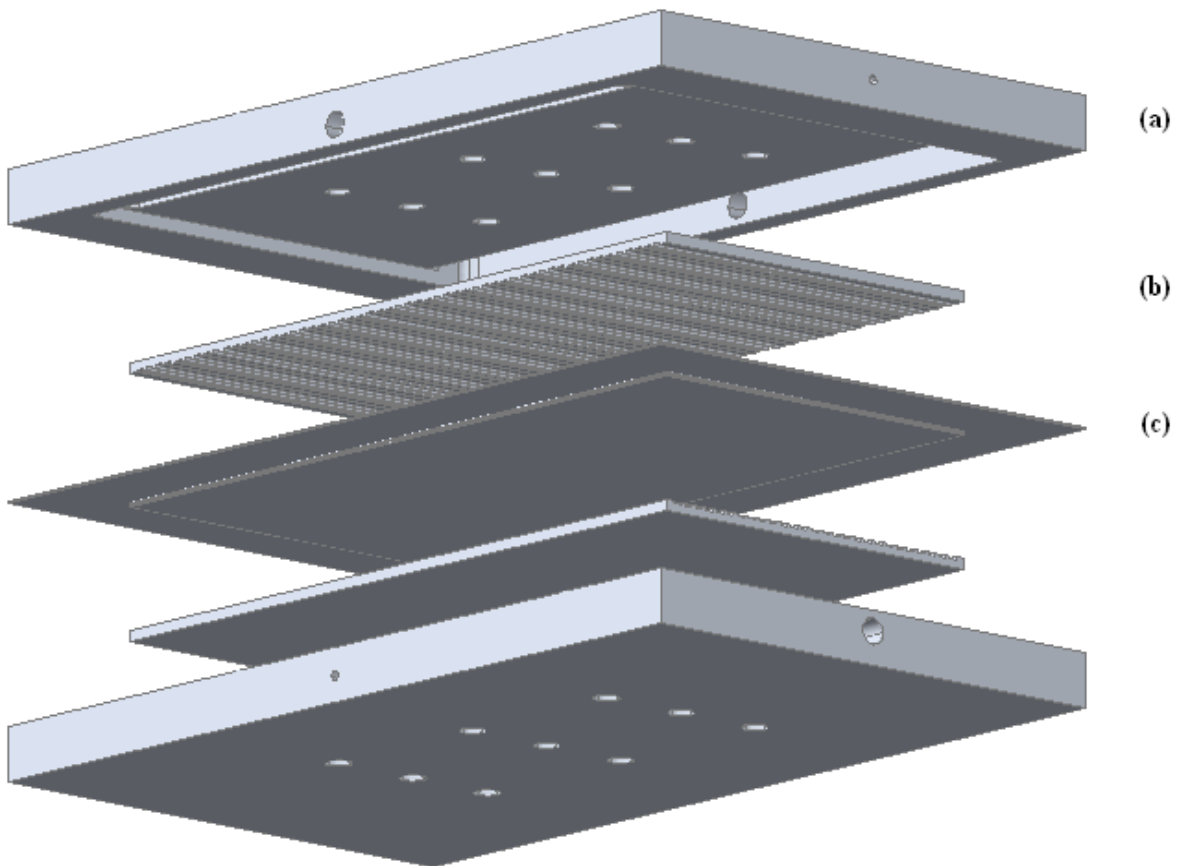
Fixture: Exploded view with inserts, membrane and GDMs
